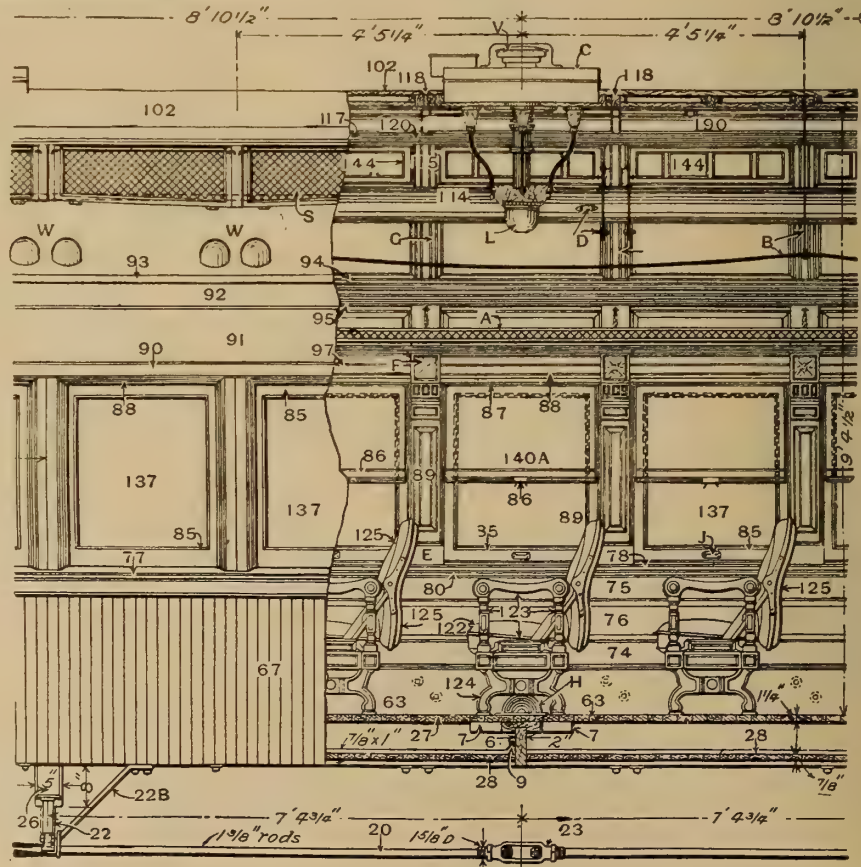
SECTIONAL SIDE ELEVATION, SHOWING EXTERIOR AND INTERIOR.
